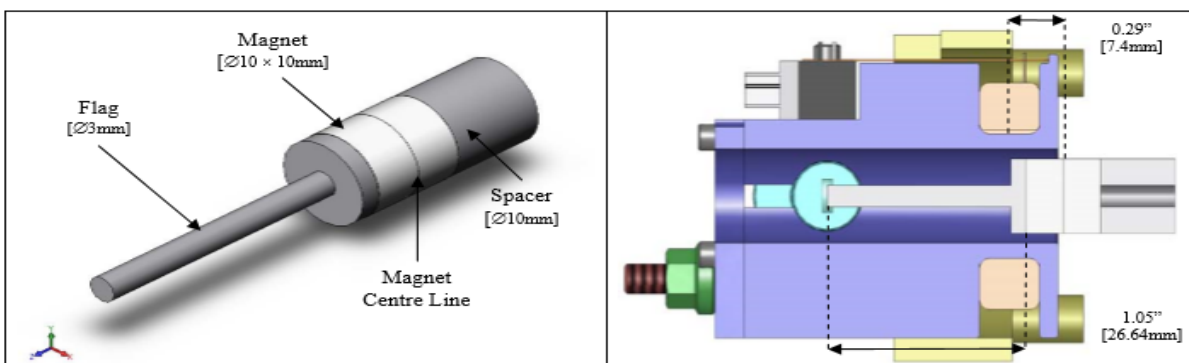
Flag, magnet and coil-former assemblies. (Left) Isometric view of flag and magnet. (Right) Section through coil-former and flag.
